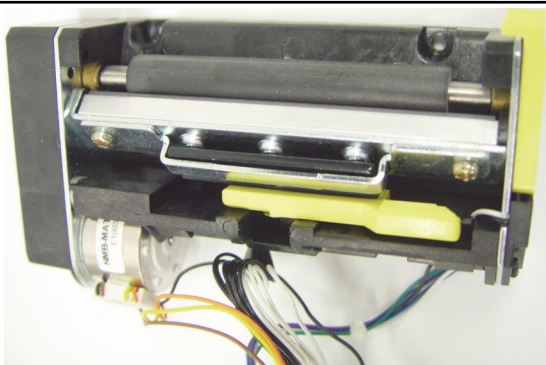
Print Mechanism, F03-66 (P/N 400-00007-100)
